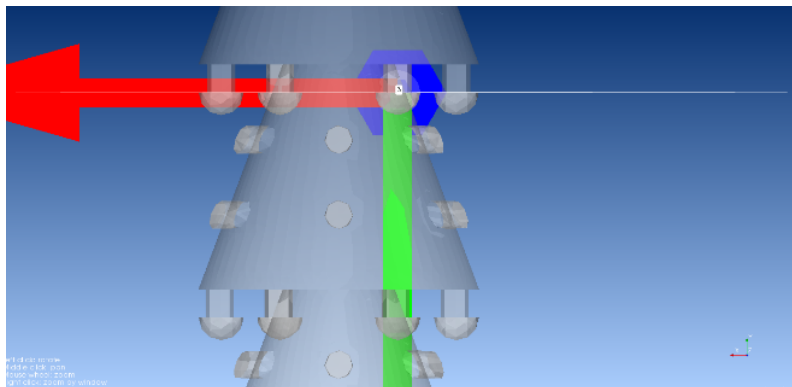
SISO - Series of Diverging Nozzles with Radial and Axial Perforations and a Constricted Opening at the Output Plane - Axial Perforations IFC - Enlarged View
